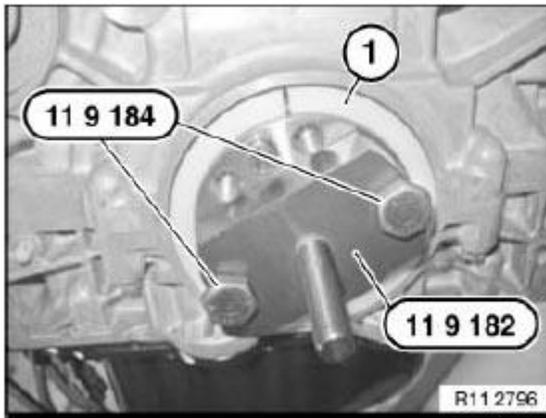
Identifying Special Tools (11 9 182 And 11 9 184)
